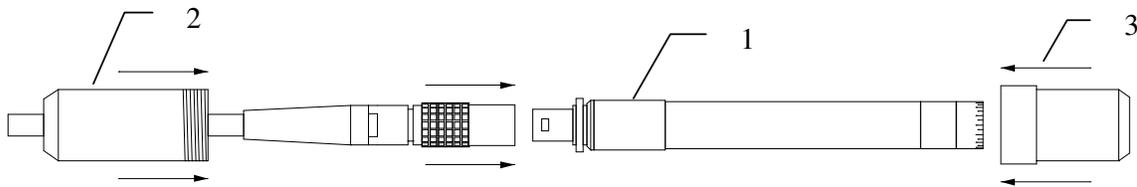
Assembling of weatherproof accessories – step 1.
